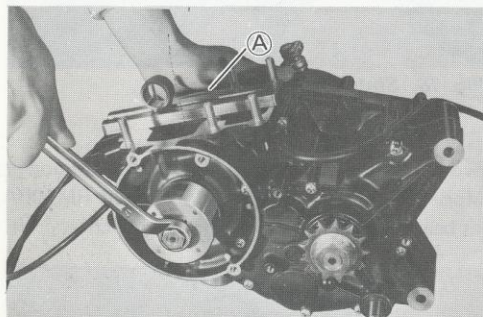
Using special tool (A), lock crankshaft and remove magneto rotor nut. The tool (A) is "09910-20113" for all three models other than Model RM125A, for which it is "09910-20114."
